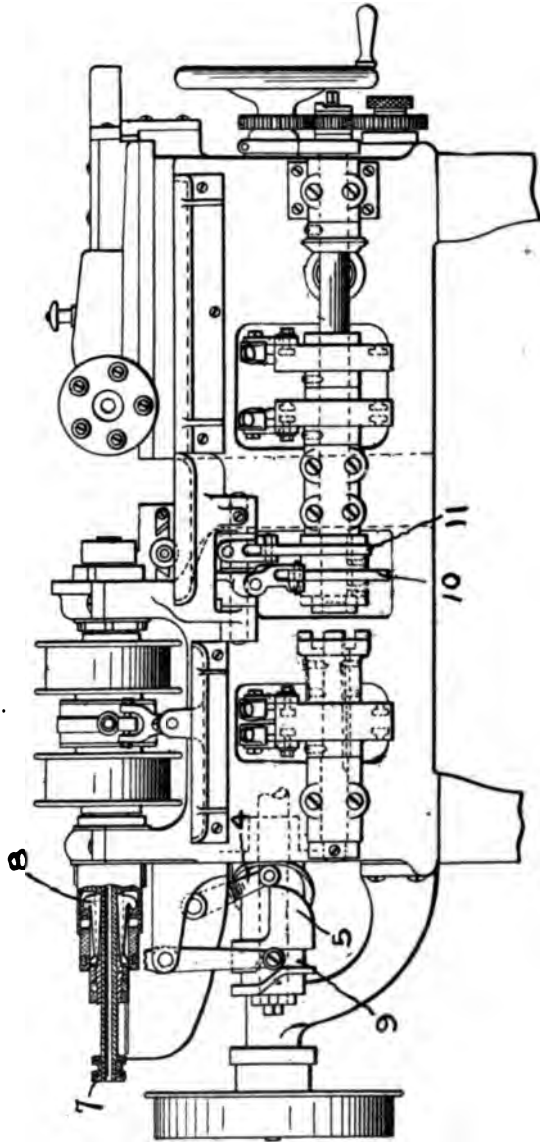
AUTOMATIC SCREW MACHINE SHOWING STOCK FEEDING MECHANISM AND METHOD OF CONTROLLING FEEDS. BROWN & SHARPE MFG. CO.
